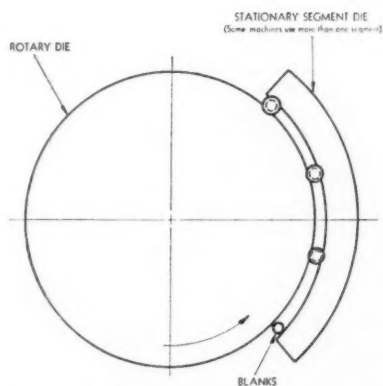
Rotary-type planetary machines use rotating die and stationary segment die
